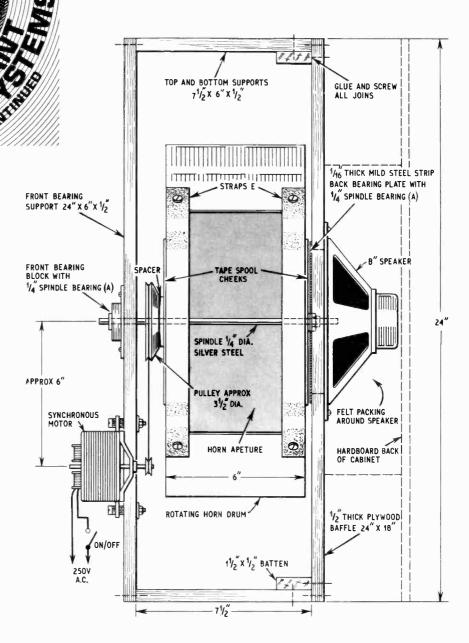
Construction of the rotating horn drum. This drawing shows the drum with one side removed
